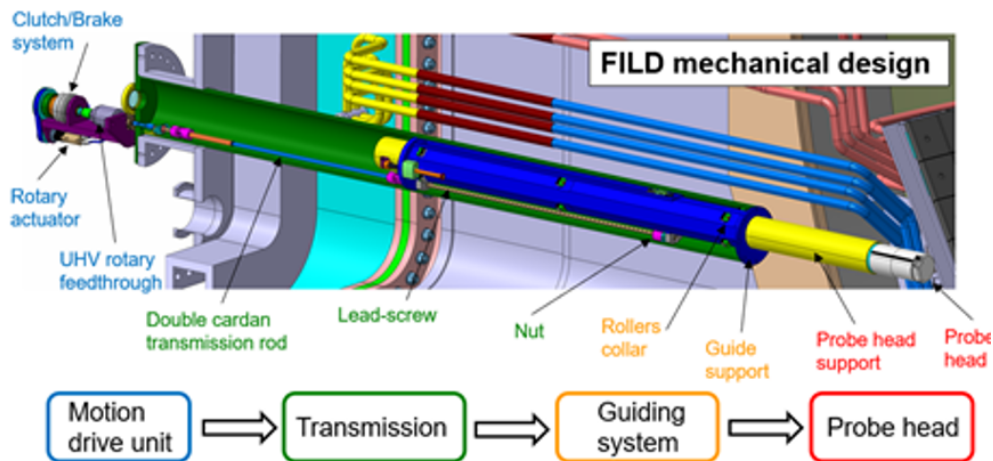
JT-60SA FILD mechanical design: the motion of the probe head is provided, ex-vessel, by the drive unit, transferred to the head support by a lead-gear and guided by roller collars attached to the fixed guide support [18].
